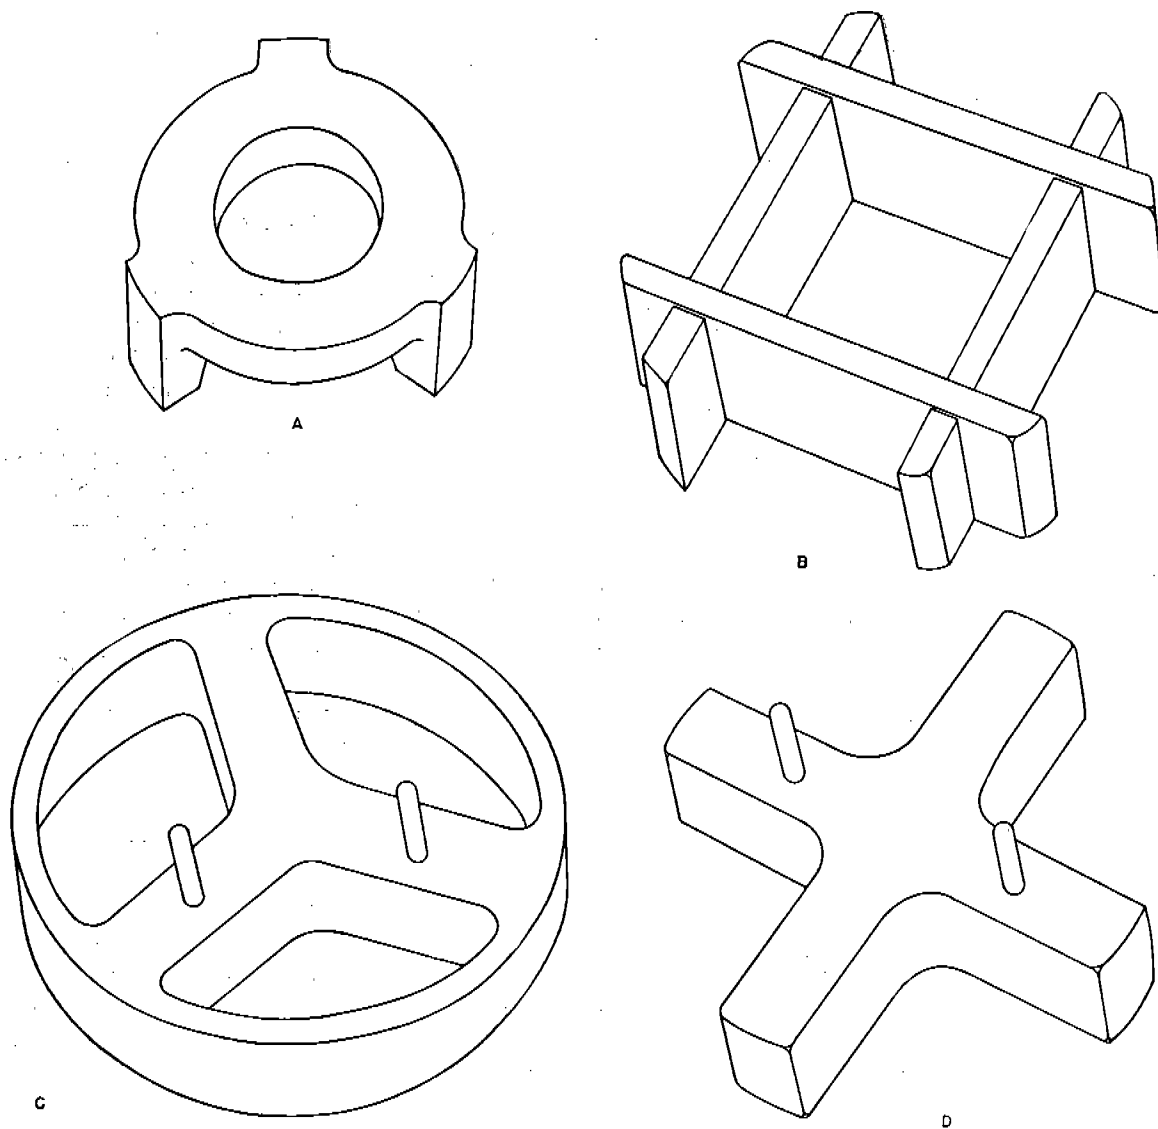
Grid types for single-nozzle motors: (A) stool, (B) box, (C) triform, (D) cruciform.
